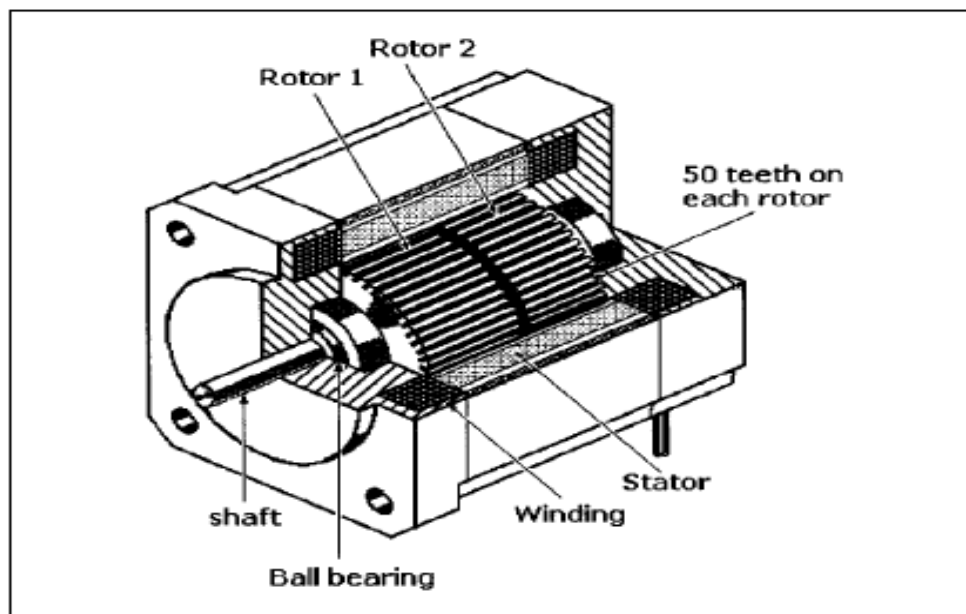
Cutaway view of a 5-phase hybrid stepping motor. A permanent magnet is within the rotor assembly, and the rotor segments are offset from each other by 3.5°.
